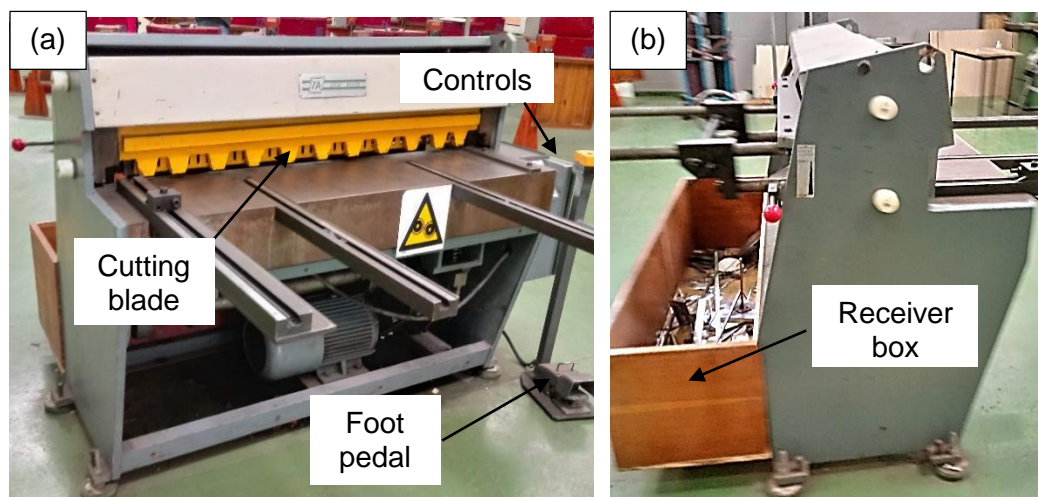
Guillotine shear master cutting machine: (a) front view; (b) side view.
